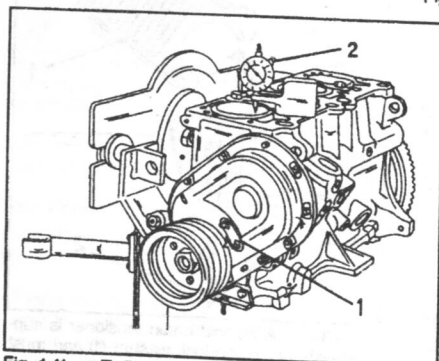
To fit the timing plate (1) in the correct position, use a dial gauge (2) to set the No. 1 piston to top dead centre. The zero on the timing plate must be in line with the notch in the crankshaft pulley.
